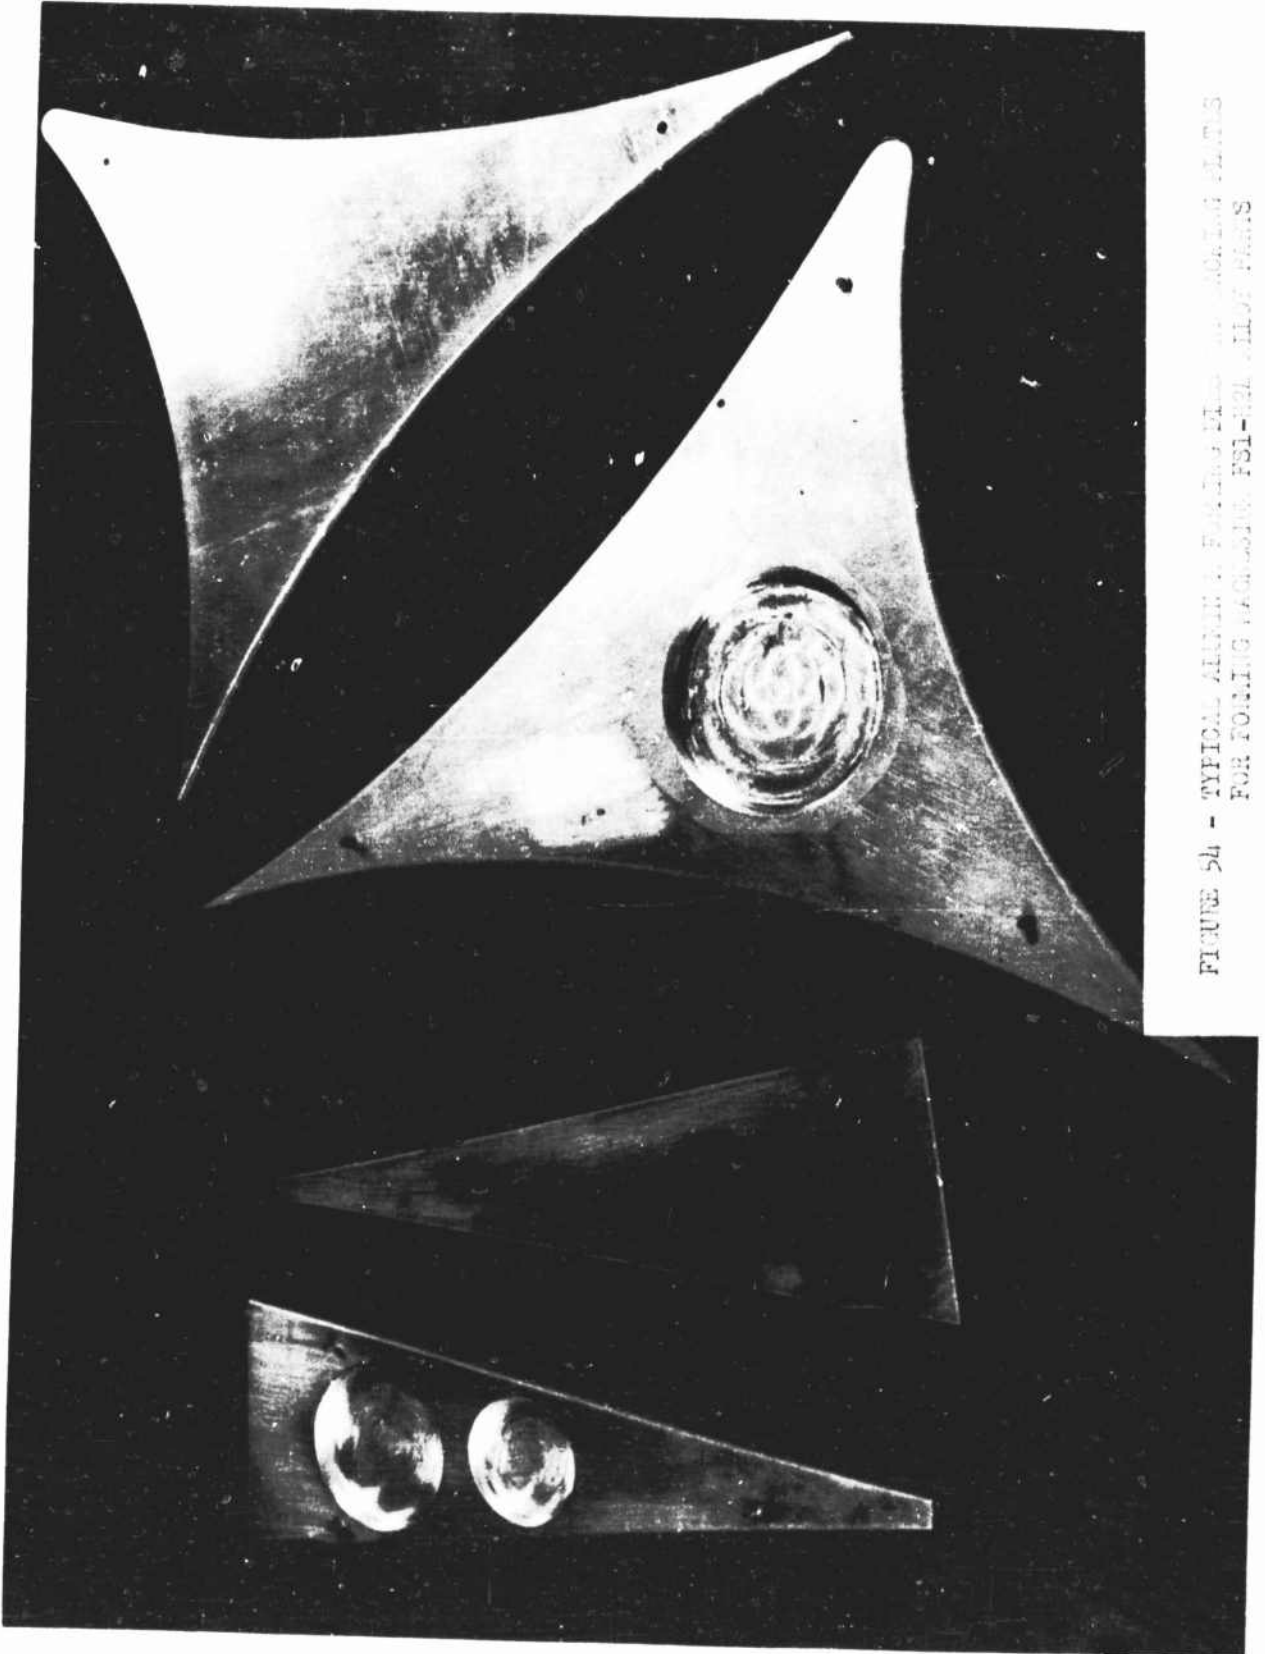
TYPICAL ALUMINUM FORGING PLATES
